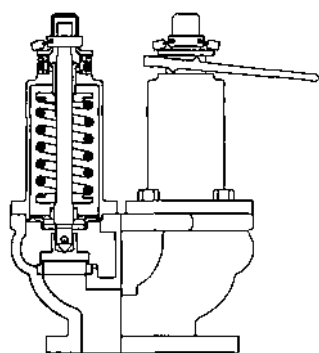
Typical steam boiler safety valve (courtesy of Spirax-Sarco Ltd)
